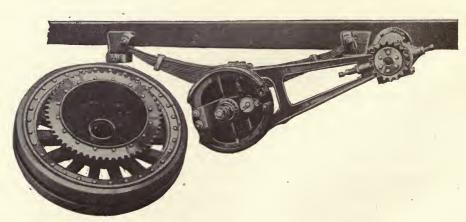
Kelley Radius Rod, Brake and Rear Axle Construction.
